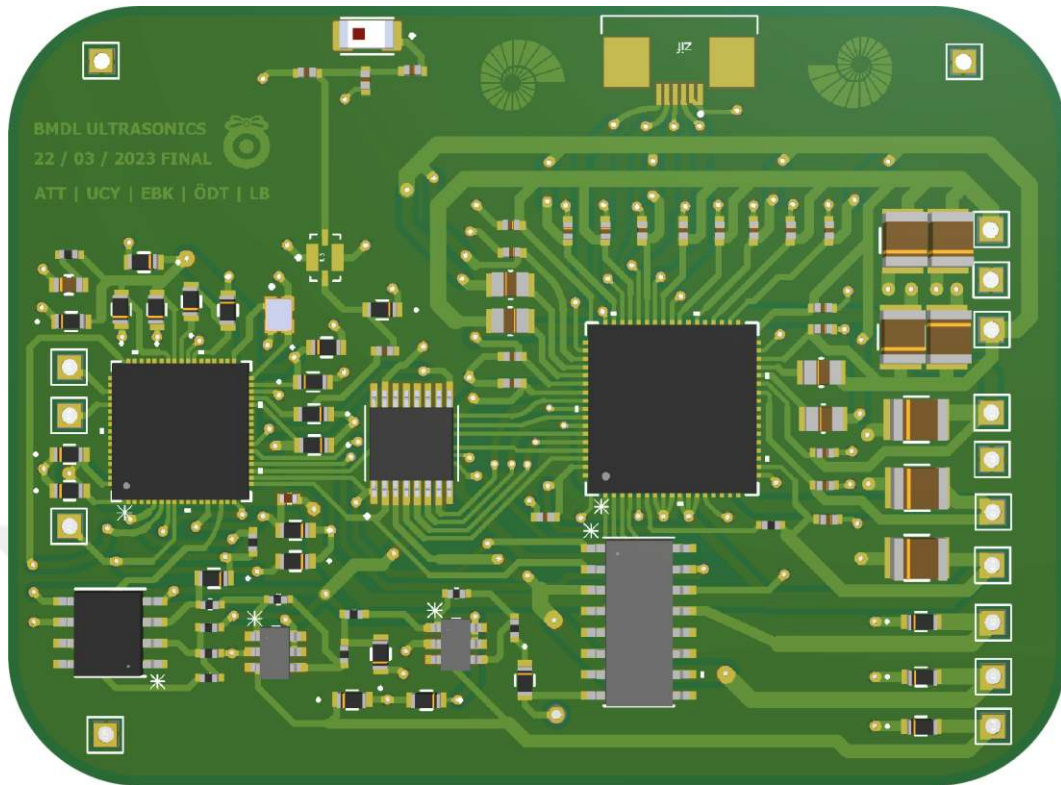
1: Top layer layout of the miniaturized PCB (3d)
